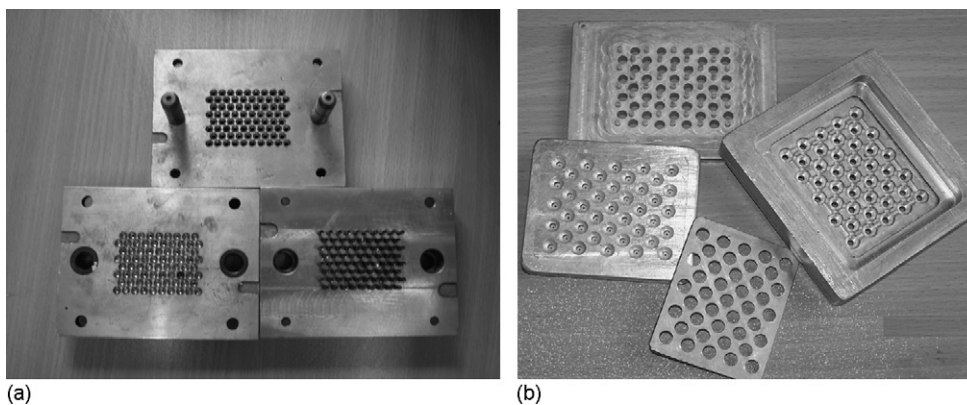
(a) Stainless steel mold. (b) Aluminum mold.
